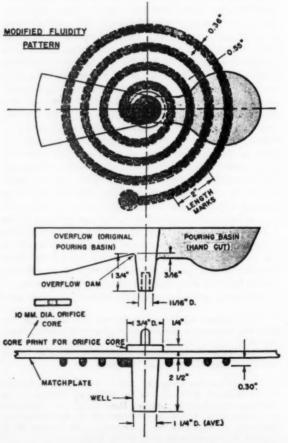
The modified spiral casting employed for making fluidity measurements (Reference 2).
